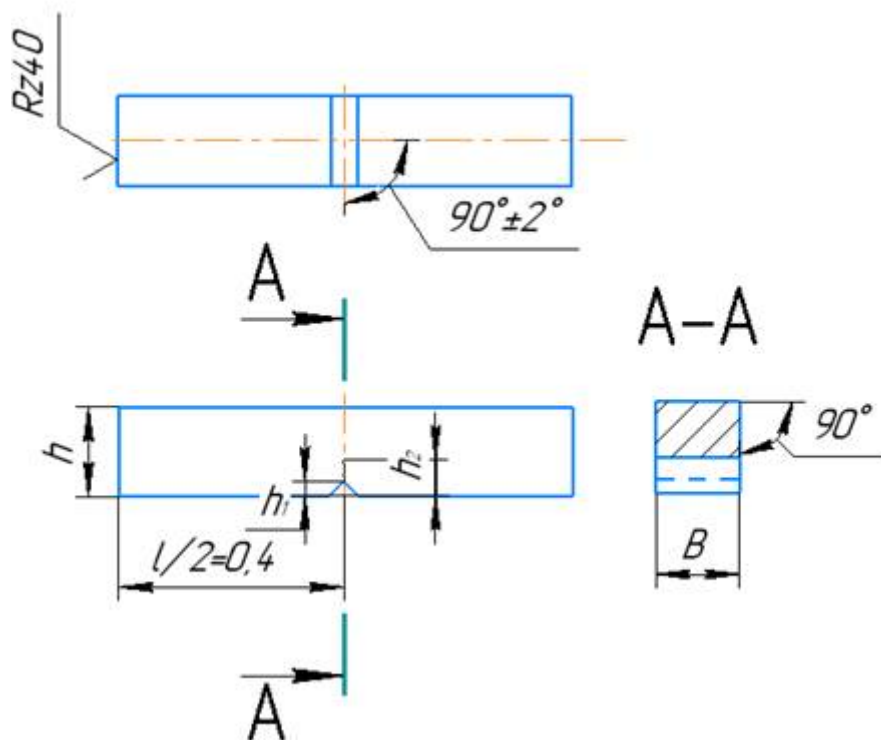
Sample with T type field shaper (fatigue crack)
